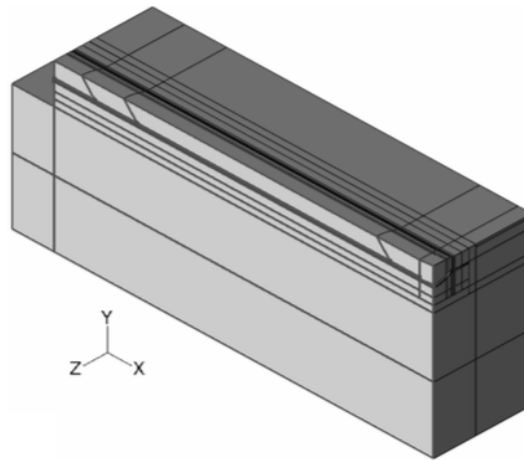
Workpieces subcomponents, (A) cut-part; (B) uncut-part; (C) support part 1; (D) support part 2; (E) support part 3 [2]
